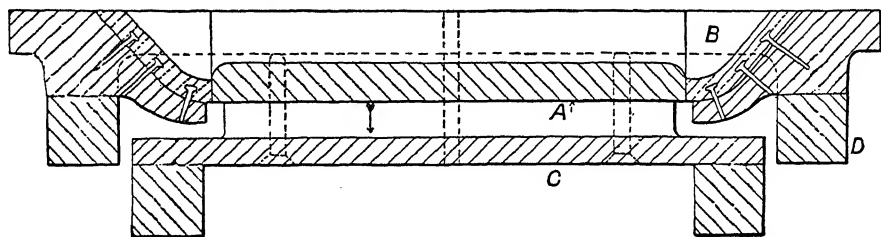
Portion of Pattern A being drawn through Stripping Plate B lined with White Metal. C, Pattern plate. D, Frame of Machine.
